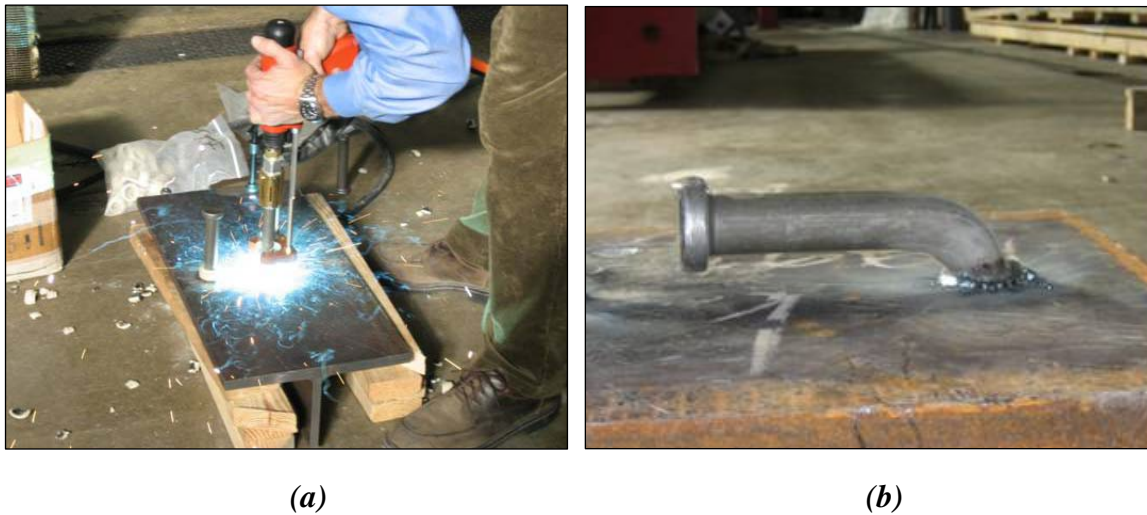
(a) Stud welding; (b) bend over test
